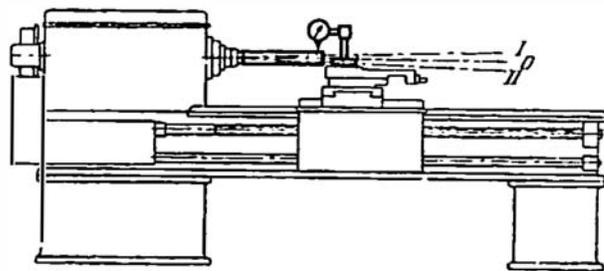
Mandrel running out of Truth must be set to Mean Position before Testing for Parallelism with the Bed
